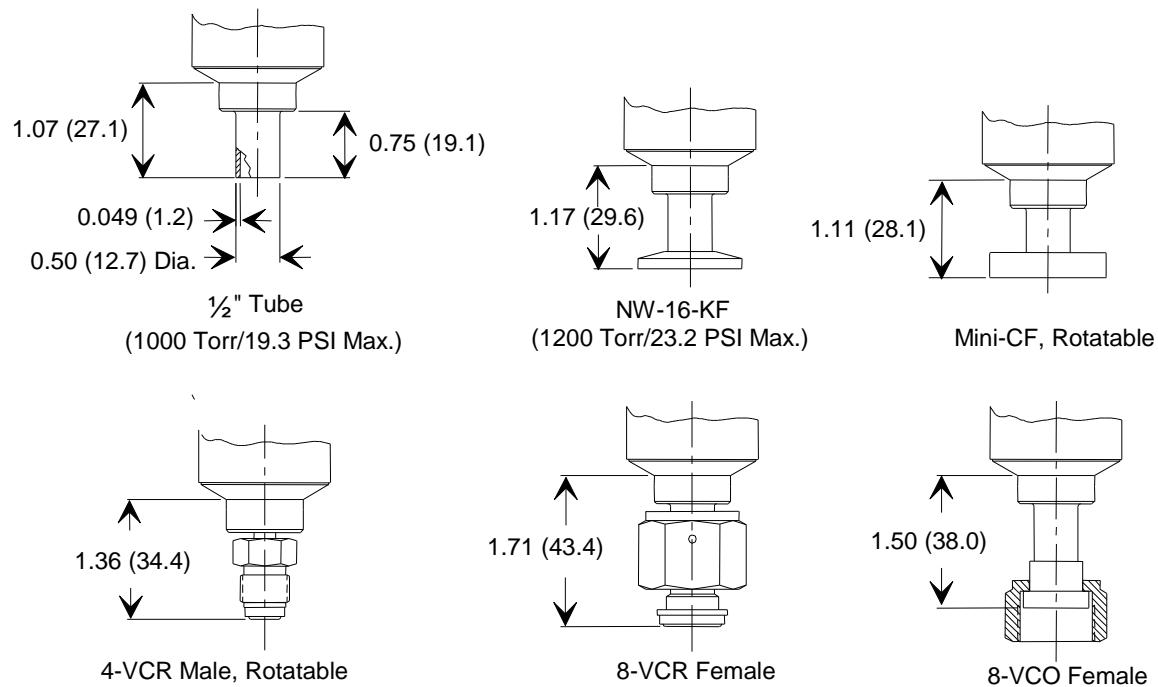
Fitting Dimensions of the High Pressure Type 722C Transducer
